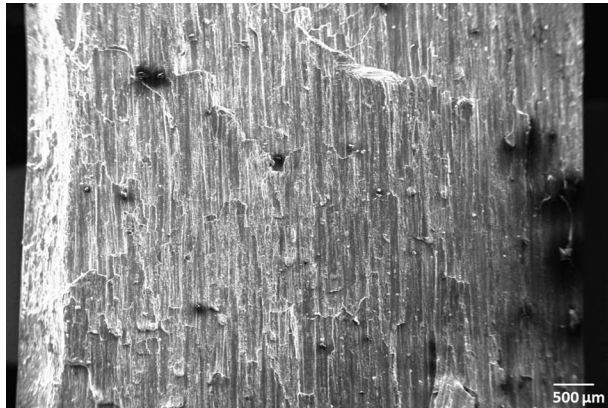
Fracture surface of AFNOR 7020 propellant tank failed due to stress corrosion cracking (SCC) at low magnification
